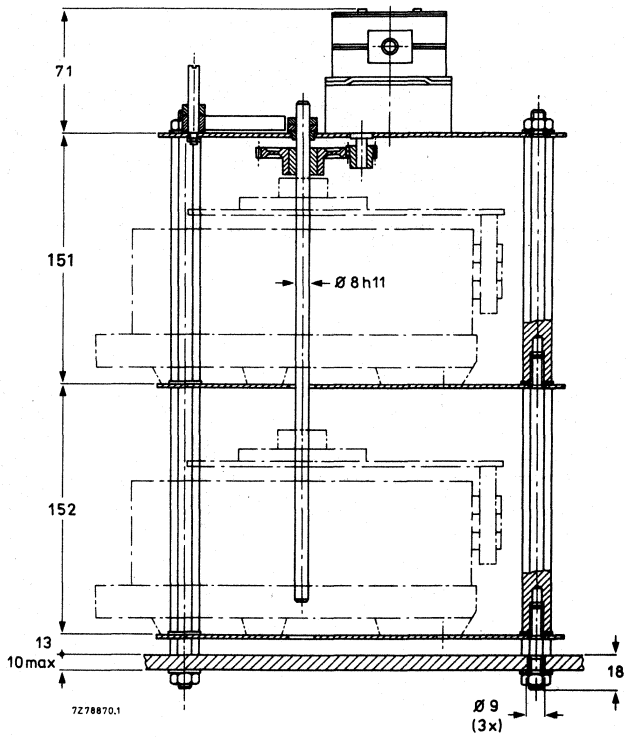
Motor drive for two ganged transformers. For connection of top-plate parts, see Fig. 24.
